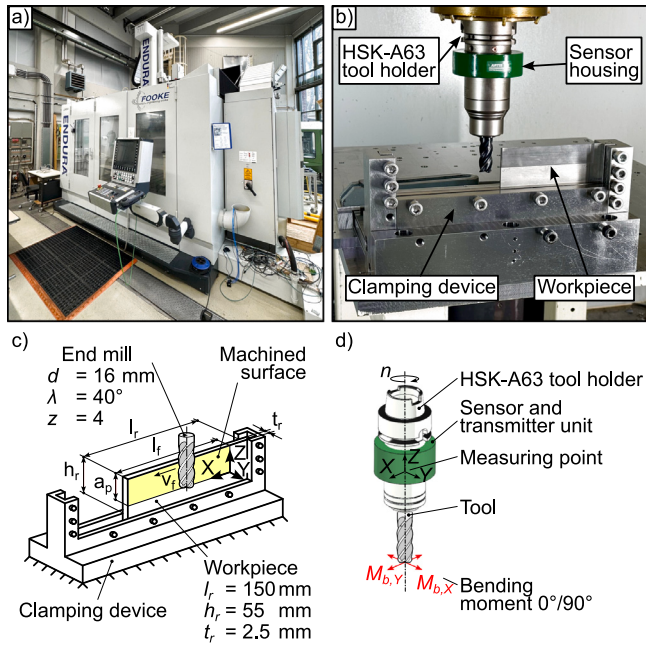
Experimental setup: (a) FOOKE ENDURA 711 Linear 5-axis gantry machining center; (b) Clamping device and workpiece; (c) Schematic representation of clamping device and workpiece; (d) Schematic representation of rotating sensor system.
